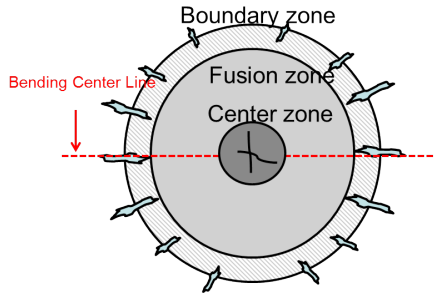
Schematic diagram showing the welding zones after Spot Varcstraint test
